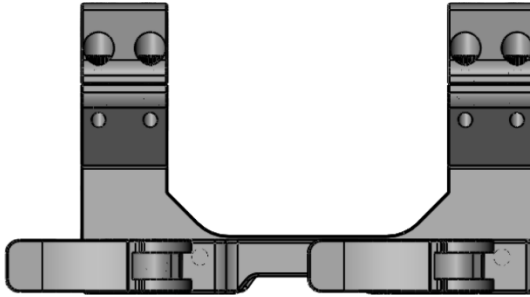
Lock the handle to the left (in disassembled state, the hook faces inward )
